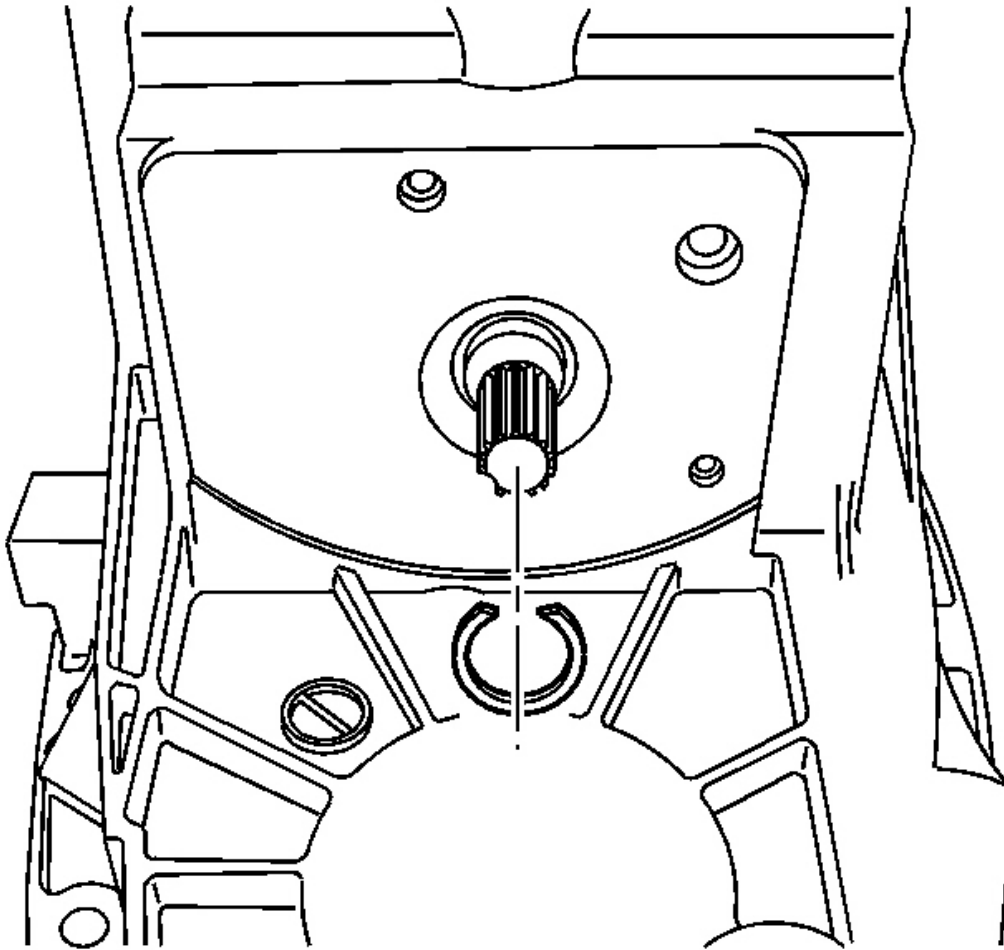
Installing Control Actuator Lever Shaft Bearing
